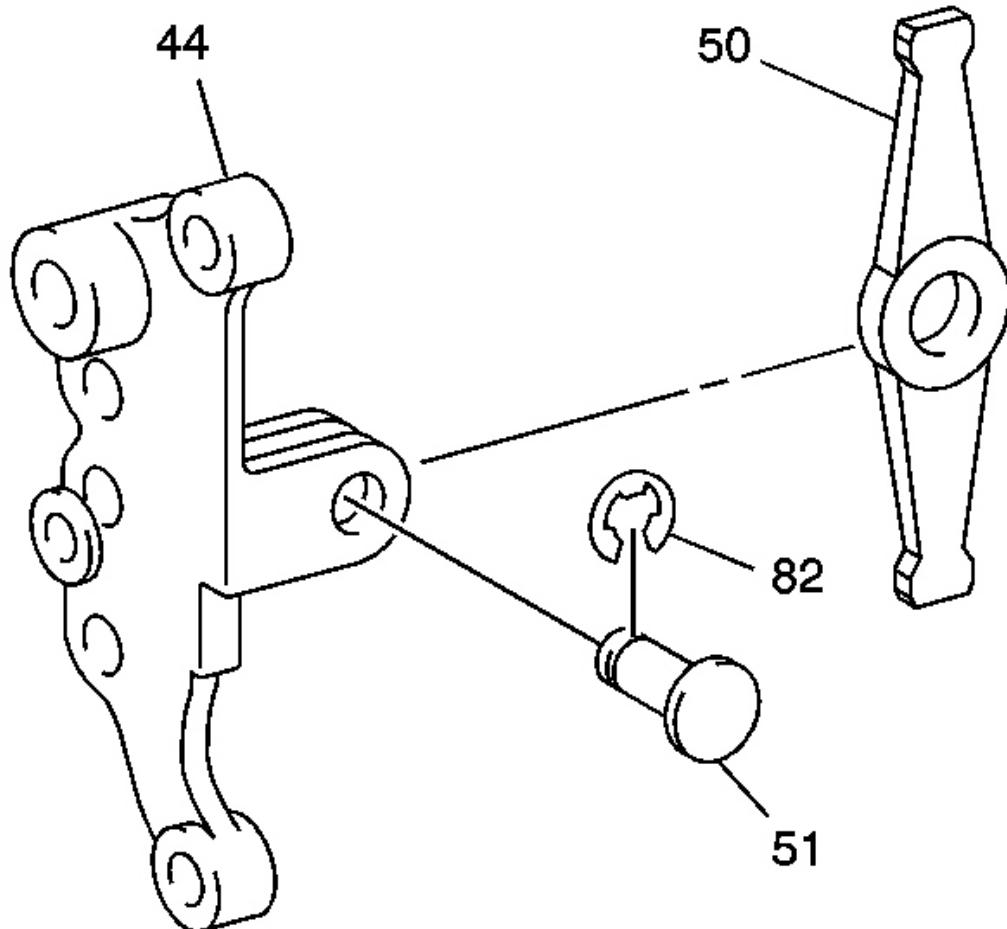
View Of Control Select Arm Pin, Shift Control Lever Bracket & E-Ring
